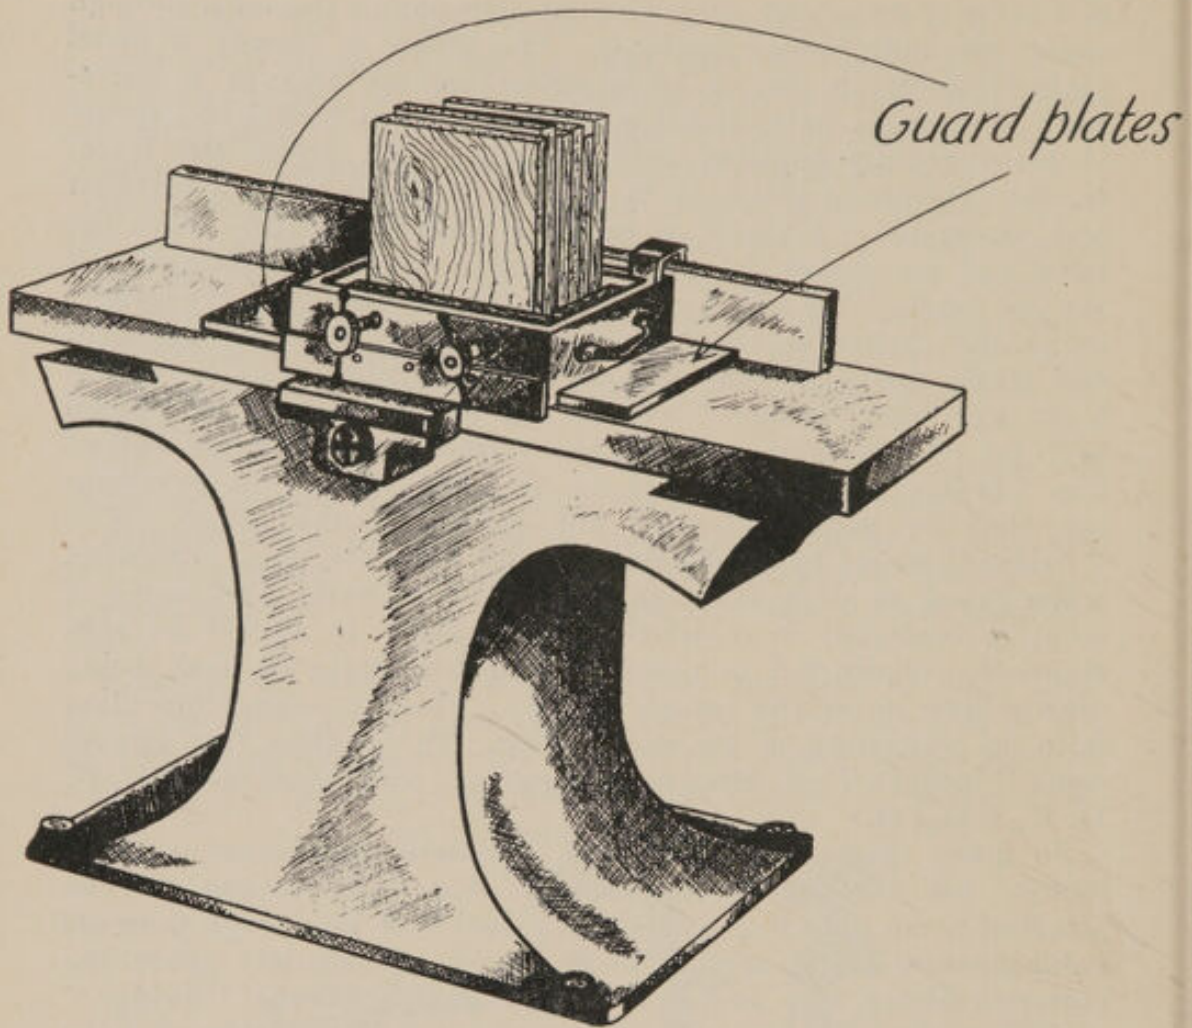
Sliding Clamp, fitted with Guard Plates for Use when Machining Ends on an Overhand Planer.
